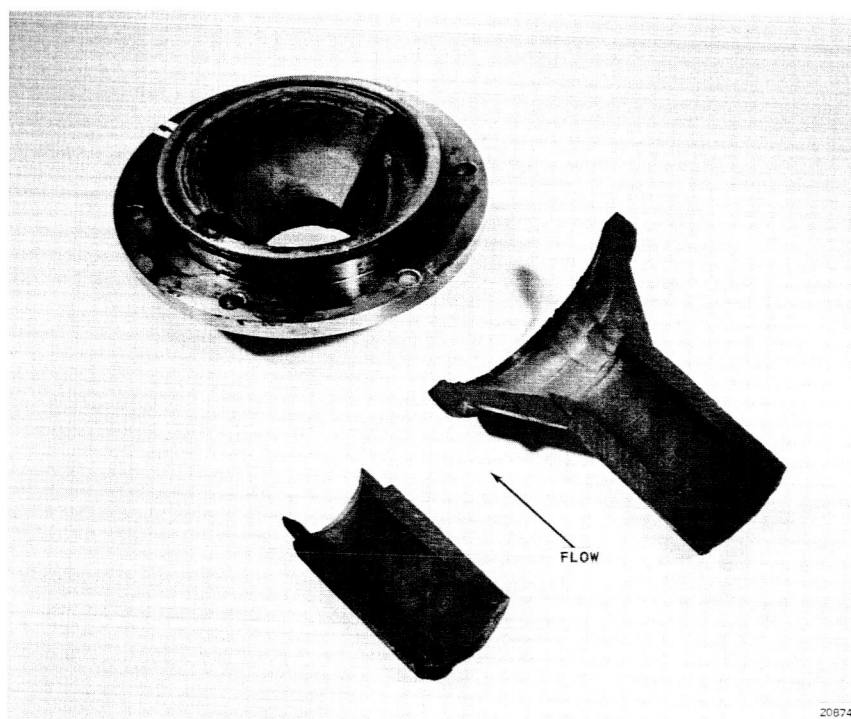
Valve End Cap, End Cap Insulation, and Supply Tube Insulation
